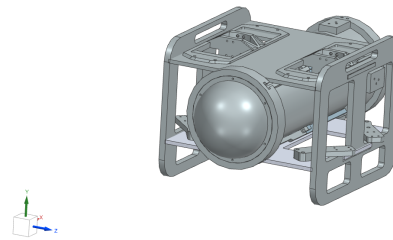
Front view of the AUV showing the spherical acrylic dome and side-plate open-frame structure.
